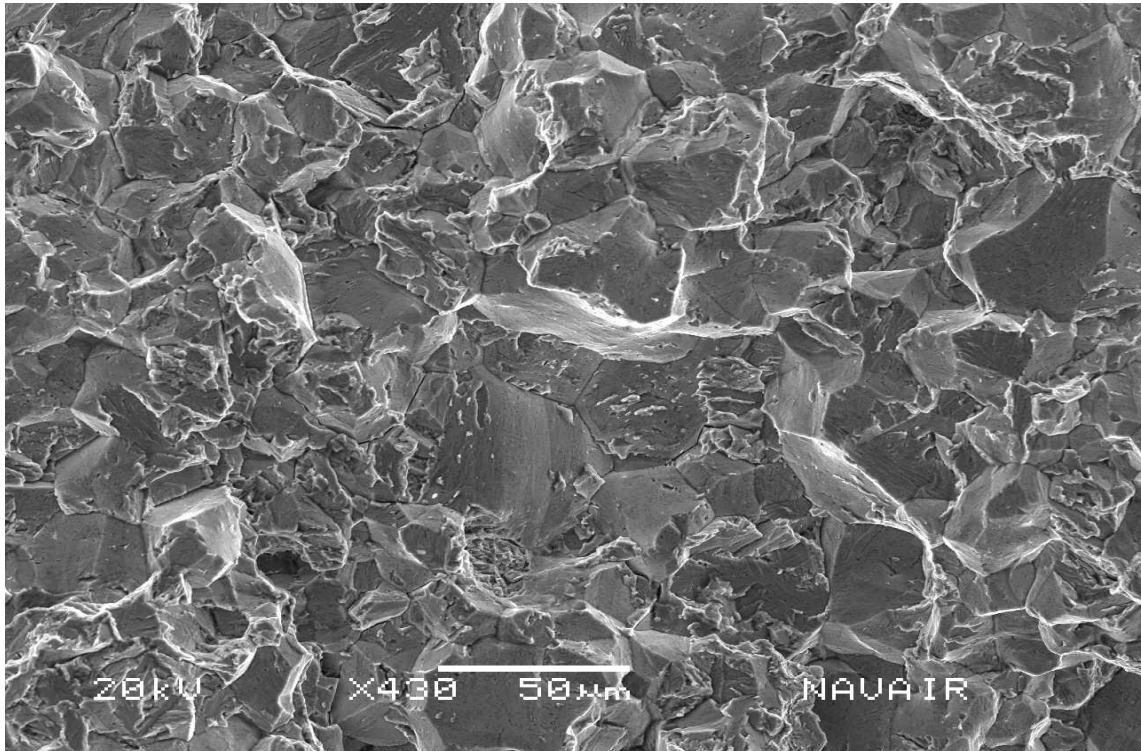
Intergranular Fracture Dominates the Brittle Fracture Zone
